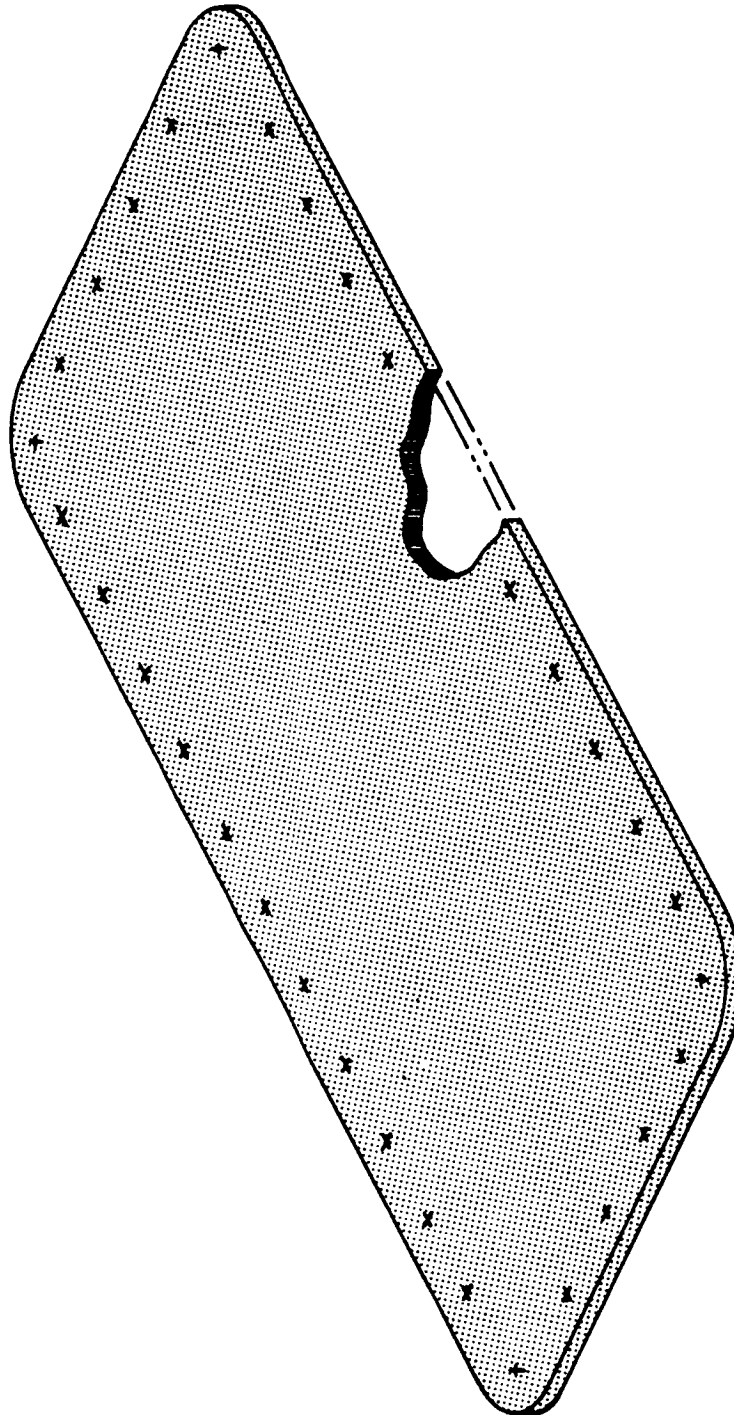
TYPICAL ACCESS DOOR ASSEMBLY
